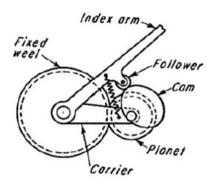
Planetary Gear-Cam mechanism with fixed sun gear
